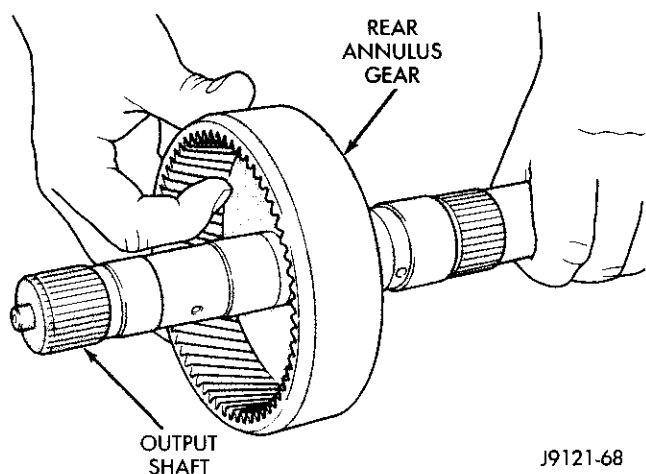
Installing Rear Annulus Gear On Intermediate Shaft
